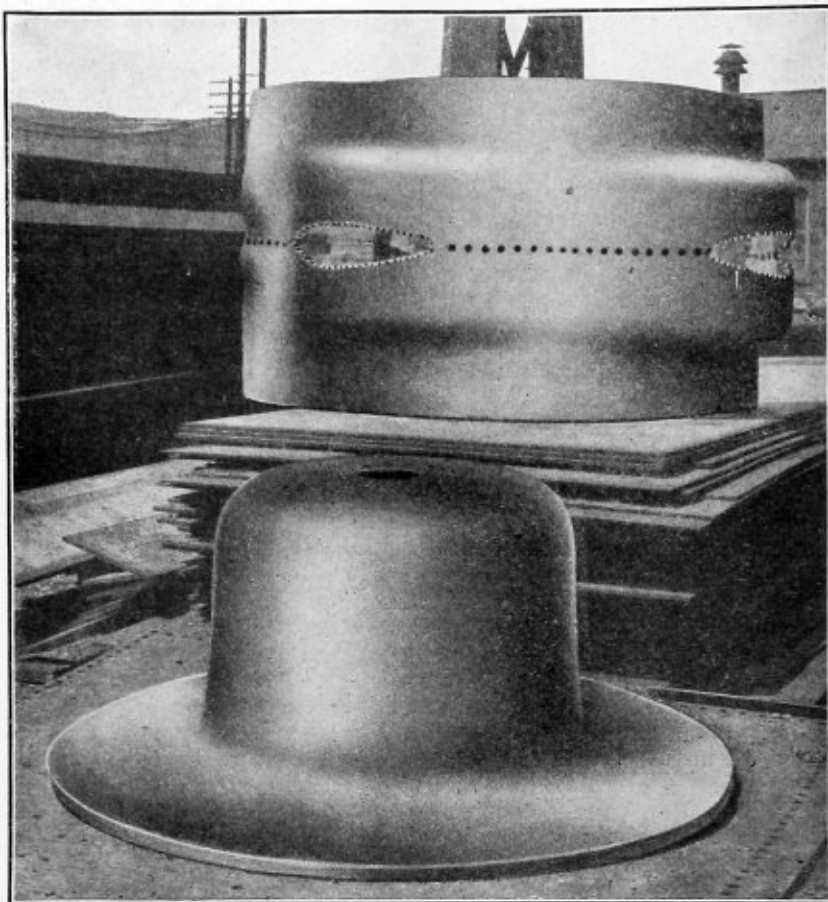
FLANGED DOME AND HIP SHEETS.
